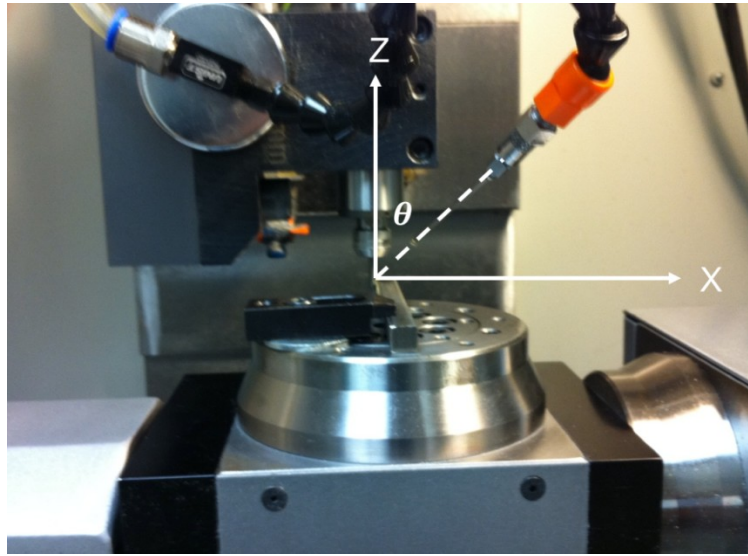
Coolant nozzle angle setup- θ direction (front view)
